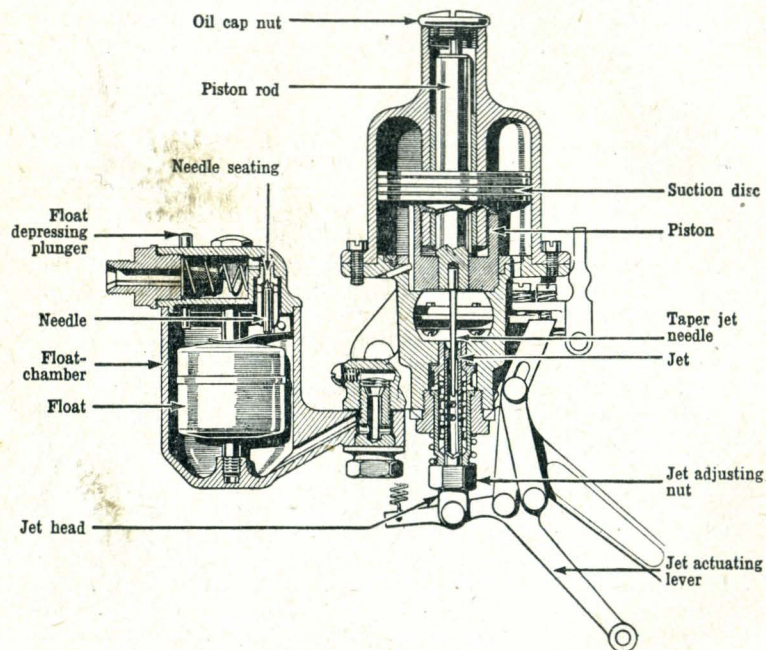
THE S.U. CARBURETTOR IN SECTION, CLEARLY SHOWING ITS INTERNAL CONSTRUCTION
